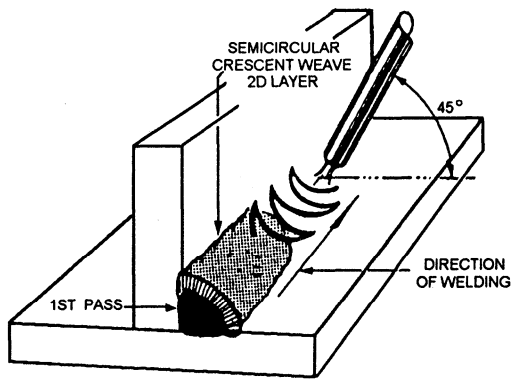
Weave motion for multipass fillet weld.
